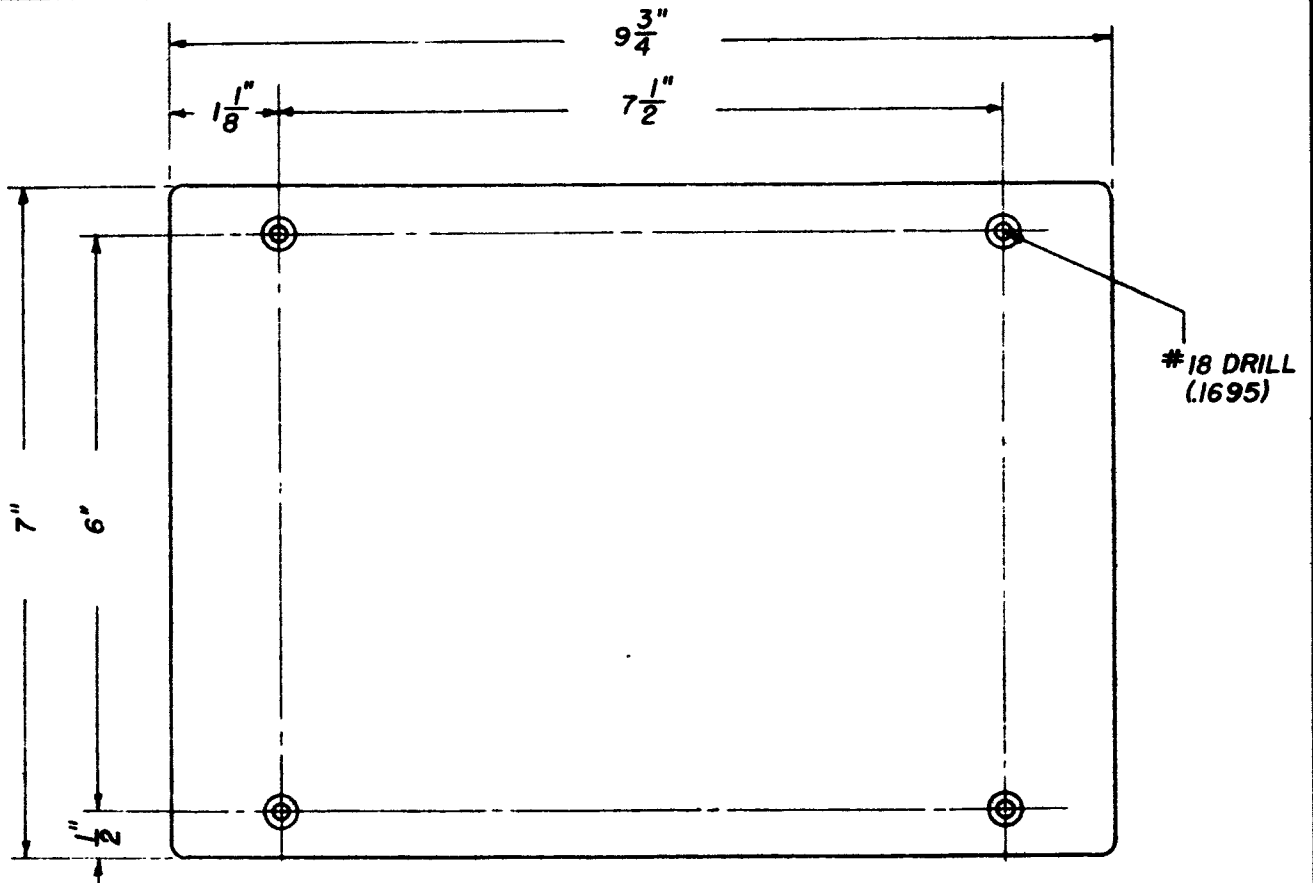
REMOTE CONTROL BASE PLATE OUTLINE DIMENSIONS
